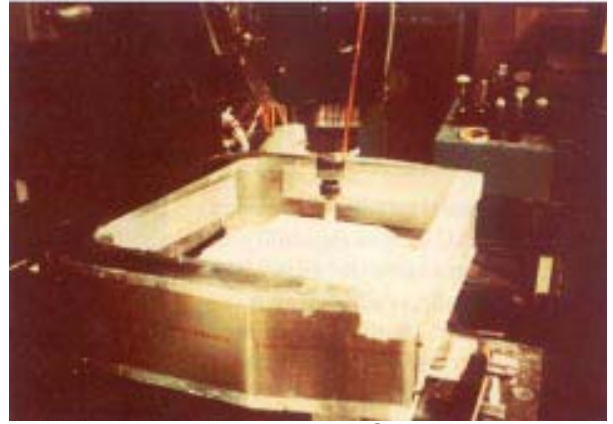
Machining pure silica @ 20,000 RPM with 2. diameter diamond tool (Turchan 1978)
